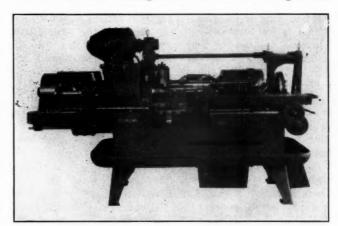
An automatic machine for the manufacture of staybolts from bar stock
